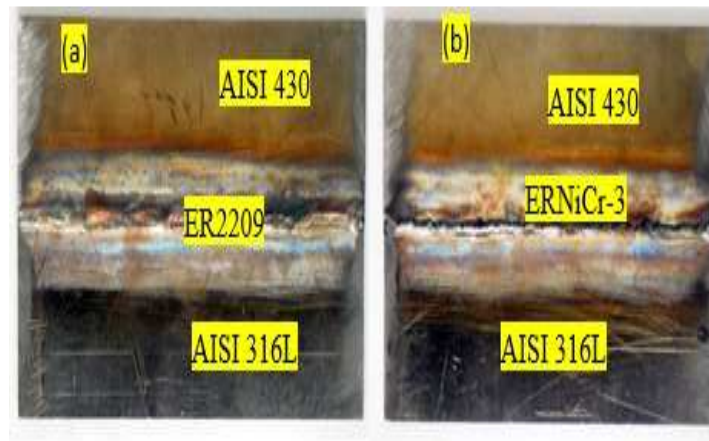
Dissimilar Weldment Images of AISI 430 and AISI 316L Employed by PCGTA Weld using: (a) ER2209 (b) ERNiCr-3 Fillers
